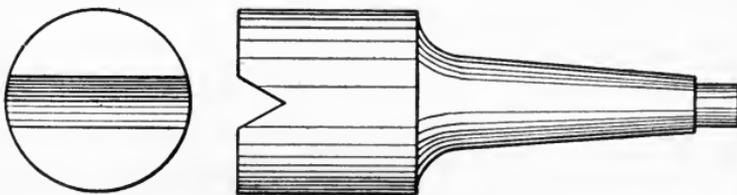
Drill Pad with V-Center for Holding Round Stock
